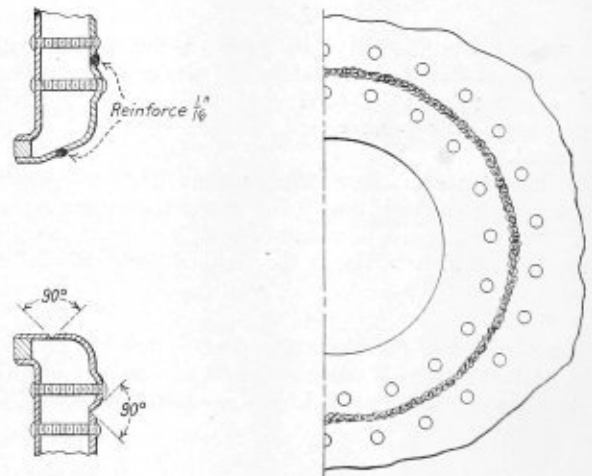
Butt Welded Fire Door Patch; Gas or Electric
